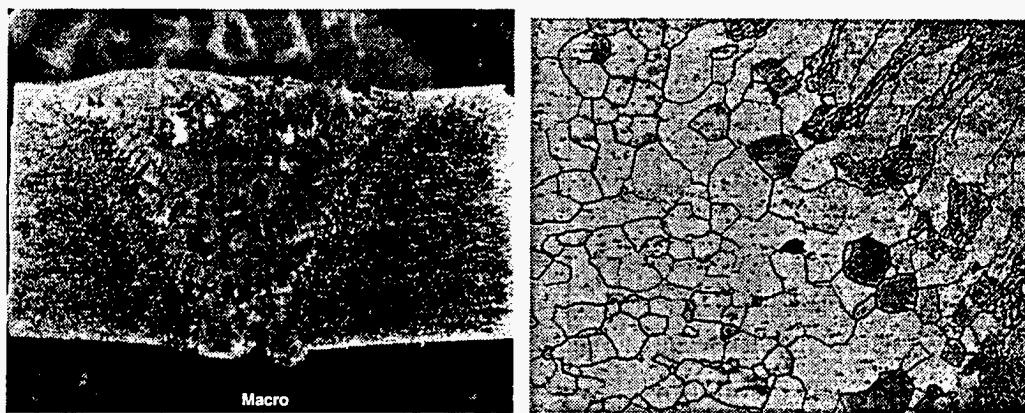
Multipass Gas Tungsten Arc Weld in 12.7-mm Thick Alloy FA-129 Plate
